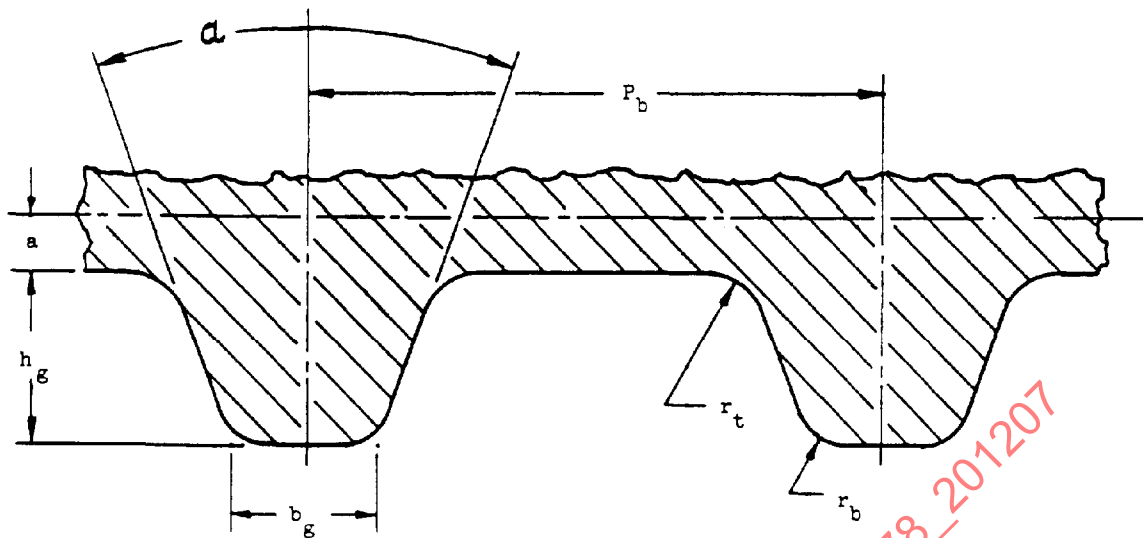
PULLEY GENERATING TOOL RACK FORM
